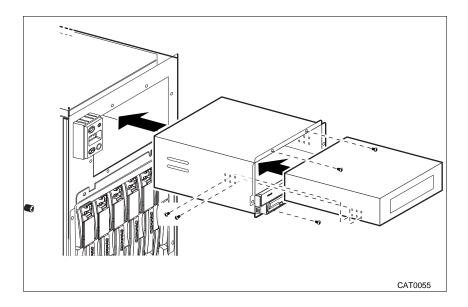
Installing a Tape Drive In to the Removable Media Bay
